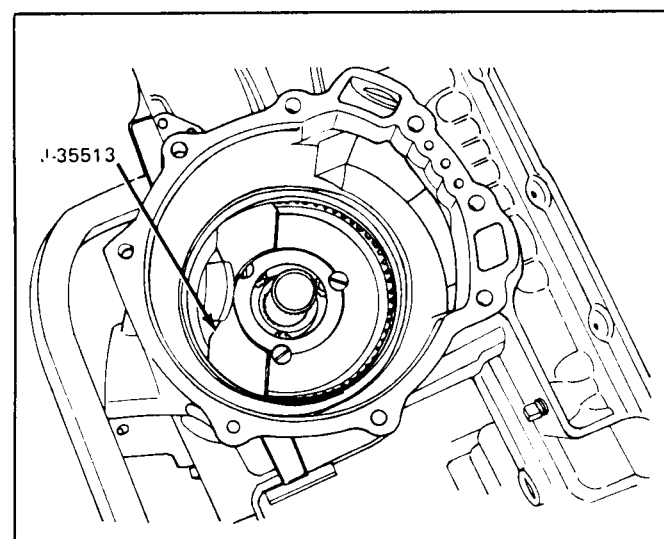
A-121 Low/Reverse Clutch Pack Spacer
